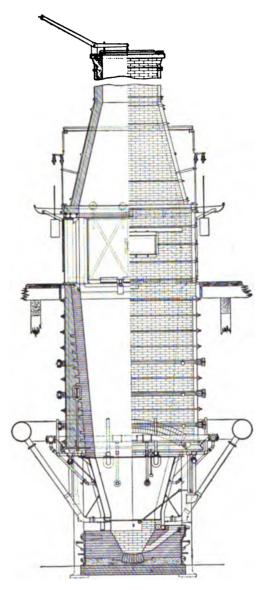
SILVER-LEAD BLAST-FURNACE (TRANSVERSE ELEVATION).
